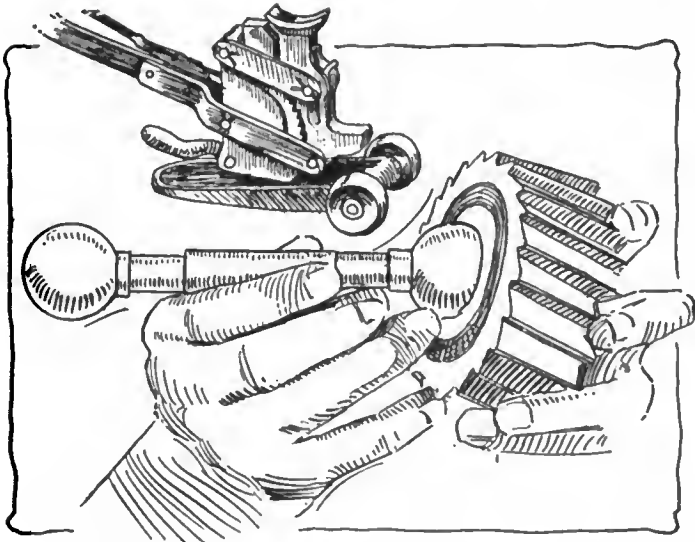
Excel automobile jack. Fig. 7—Atlas ball gauge
